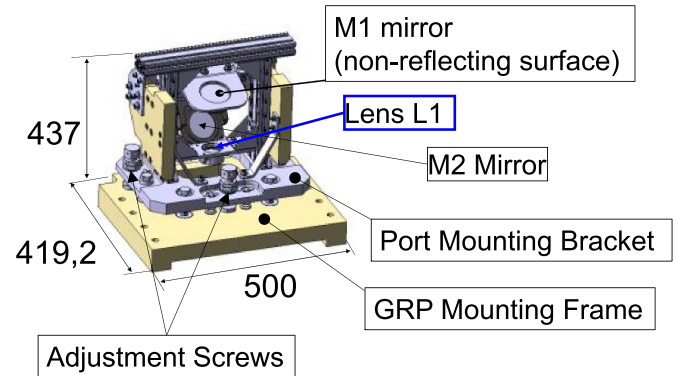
Front view of the DIR-L1-M1-M2 assembly noting overall dimensions in millimetres and key components.
